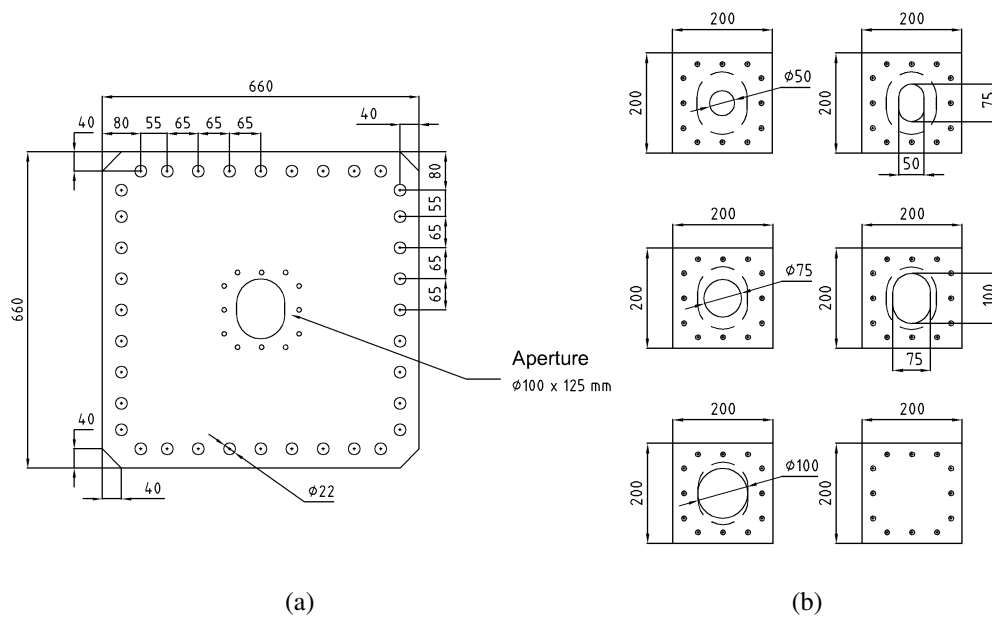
Engineering drawing of (a) characterisation plate and (b) bolt-on apertures - units in mm.
